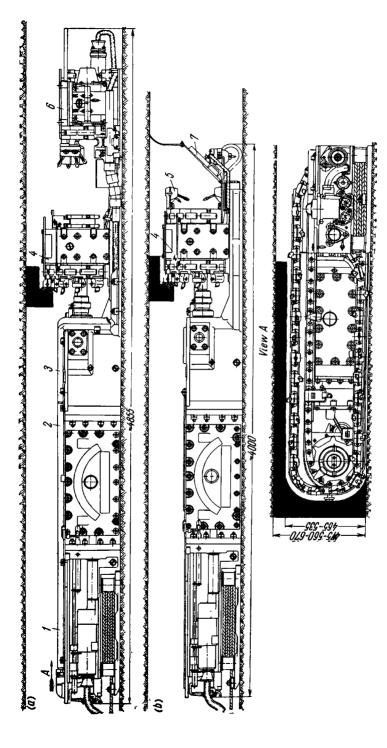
Kirovets cutter-loader: i—feed head; 2—electric motor; 3—cutting-head reduction gear; 4—cutting head; i—loading scraper chain; 6—loop loader; 7—loading ramp
